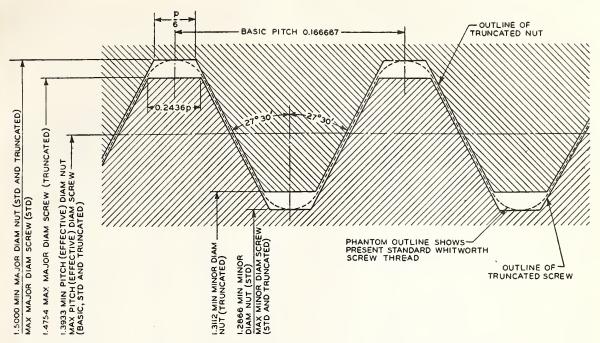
Example of screw threads of Truncated Whitworth form, coarse series; nominal diameter 1½ inches; 6 threads per inch; class 2 tolerance; length of engagement 1½ inches.
